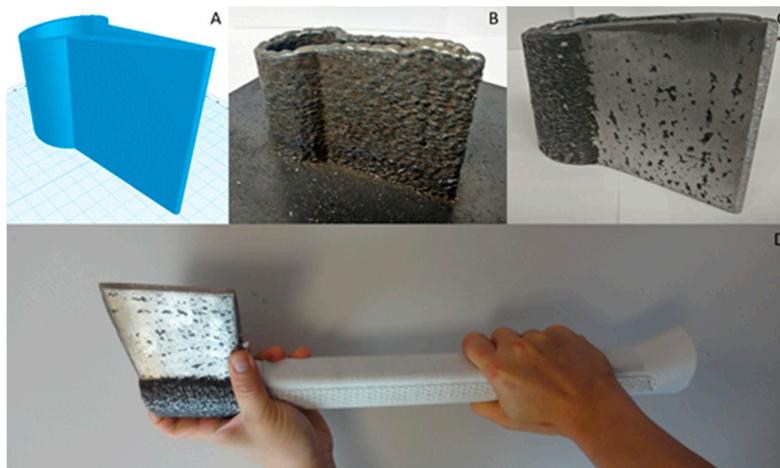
A hoe (A) 3-D model of handle hold; (B) metal 3-D printed part on substrate; and (C) finished hoe, cut and mounted to wooden handle.
